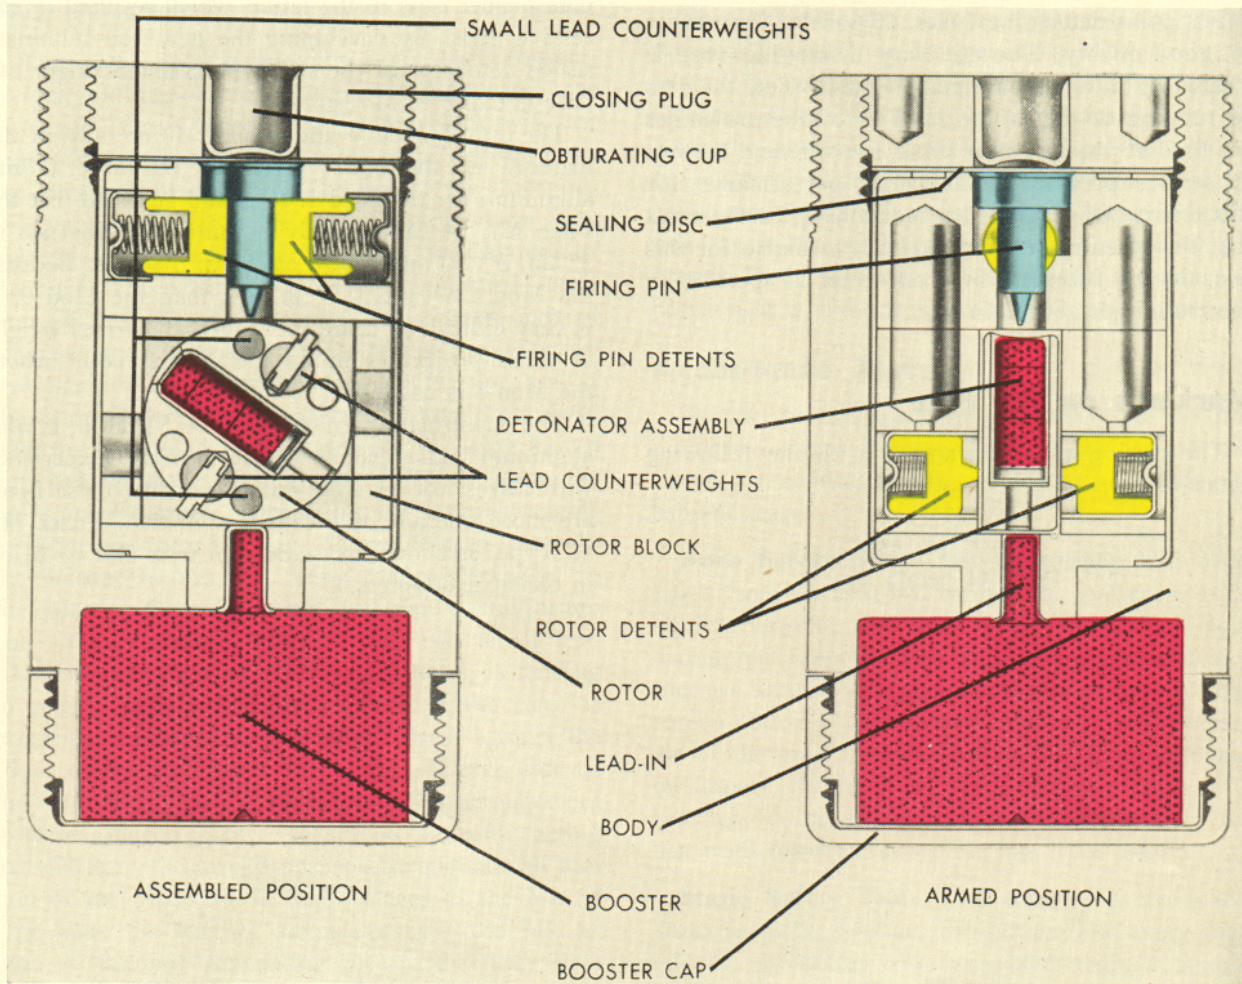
Auxiliary Detonating Fuze Mk 55—Sectional View
